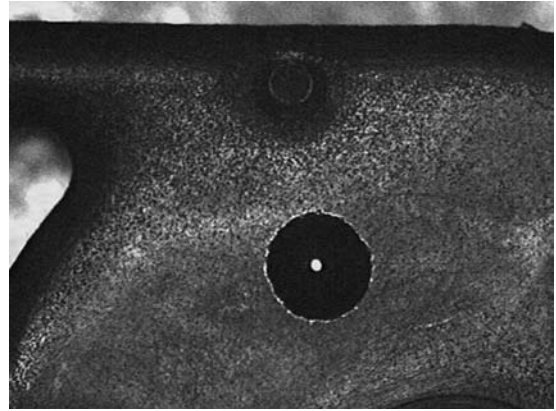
Time-lapse photograph of a sintered bearing impregnation fluid on an injection molded component surface (start of test).
